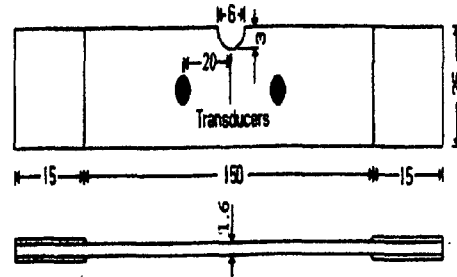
Dimensions of specimens ; all dimensions in mm.
